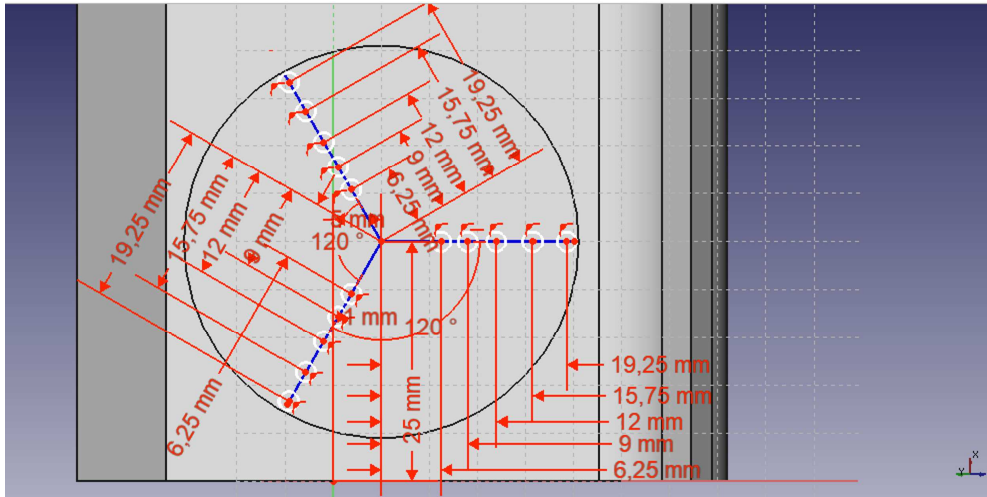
Geometrical dimensions of piezo placement on the mini-boat surface.
